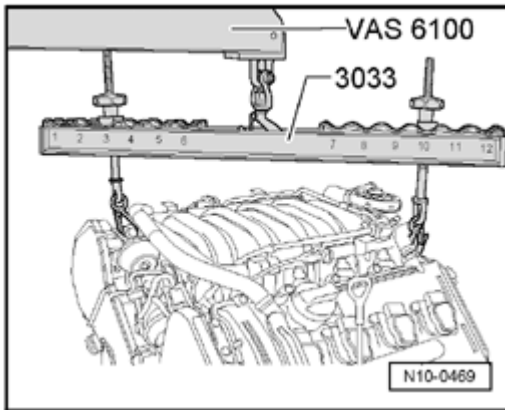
Lifting Engine From Assembly Platform Using Shop Crane VAS 6100 And Lifting Device VAS 3033
